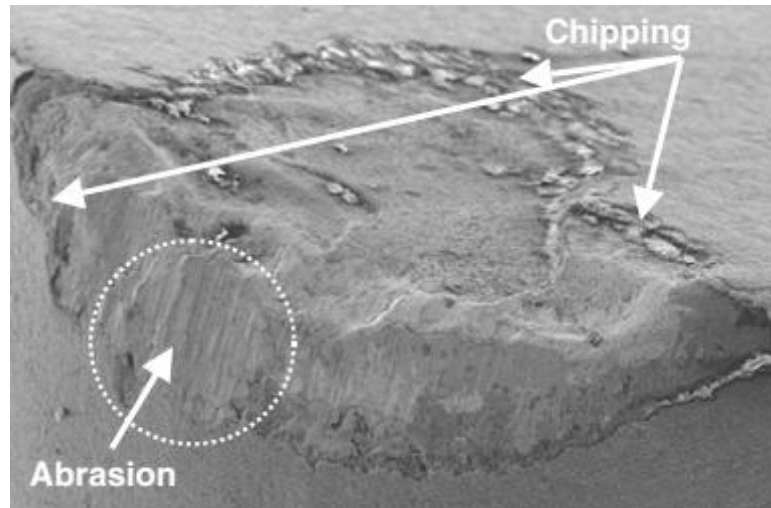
Abrasion and chipping wear on worn cemented carbide cutting tool (Courtesy, Sales et al., 2009)
